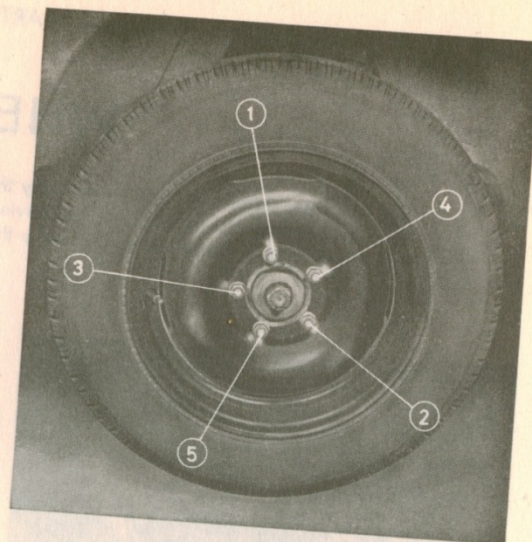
Lift on the new wheel after cleaning the contact surface between the wheel and the hub. Tighten the nuts so that the wheel is firmly on the hub. Lower the car and tighten the wheel nuts. Tighten each nut a little at a time until they are all tightened to a torque of 70-100 lb.ft. (10-14 kgm)
